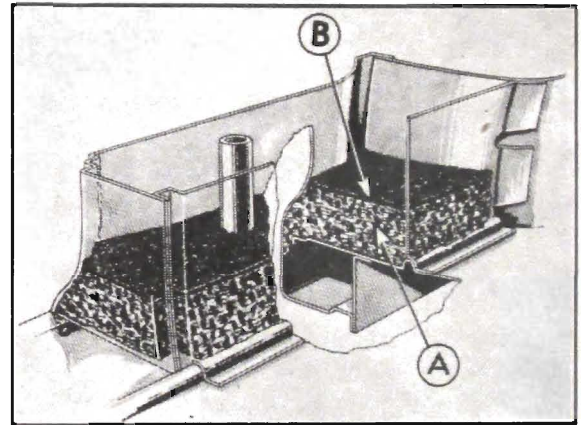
Showing how rock wool or batting is installed behind brace in front of wheelhousing on coupes to prevent dust entrance.
